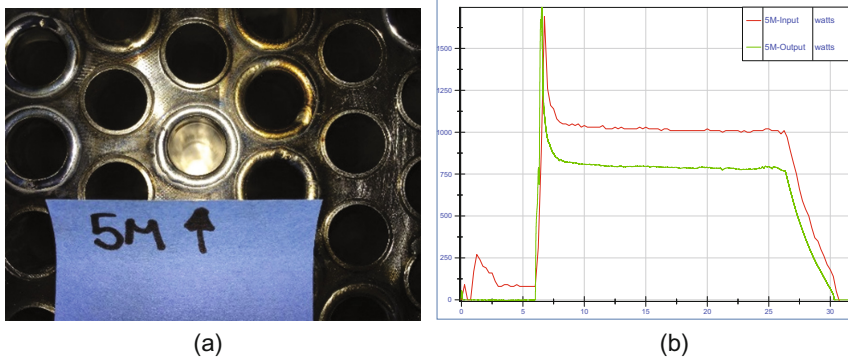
(a) Picture of a pool weld of a 316 L test structure representing the heat exchanger component found in a Nuclear reactor construction, (b) Power demanded by welding machine (in red) vs power delivered to weld (in green) $\eta = 72\%$.
